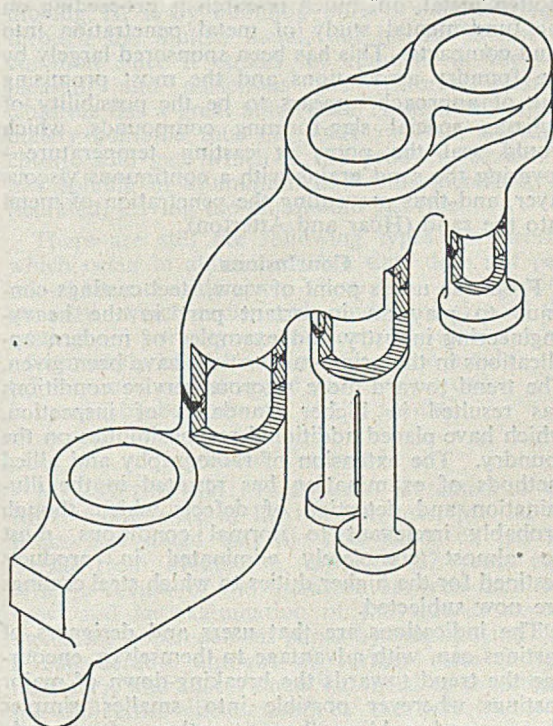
Steam-chest Assembly, Part Sectioned to show Welds.
